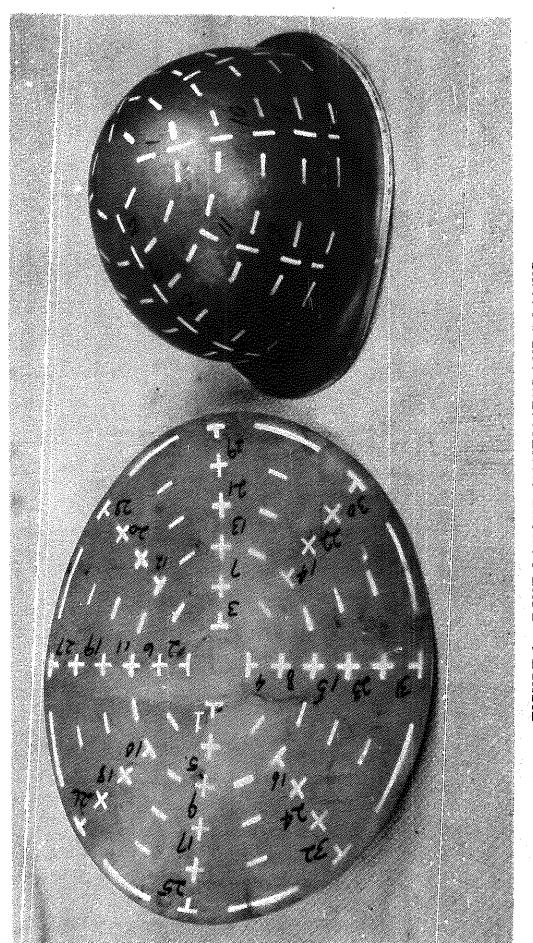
ZONE LAYOUT ON HELMETS AND BLANKS
